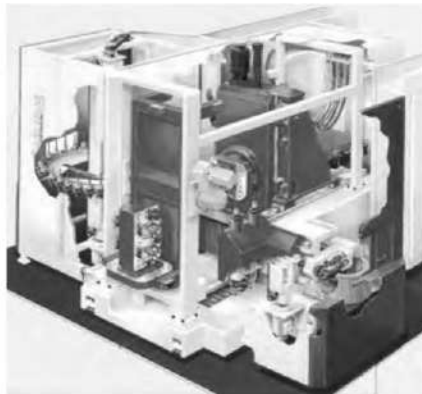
A 4-spindle CNC machining centre 4CUT for high-speed machining (Courtesy, Hüller Hille GmbH, Germany)
